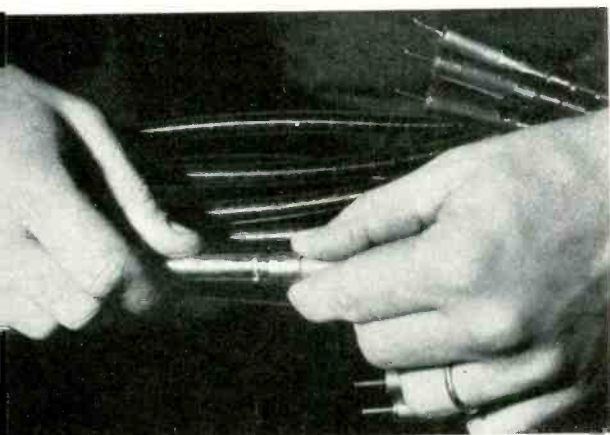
A short sleeve is used on the opposite coaxial to hold the steel tapes
